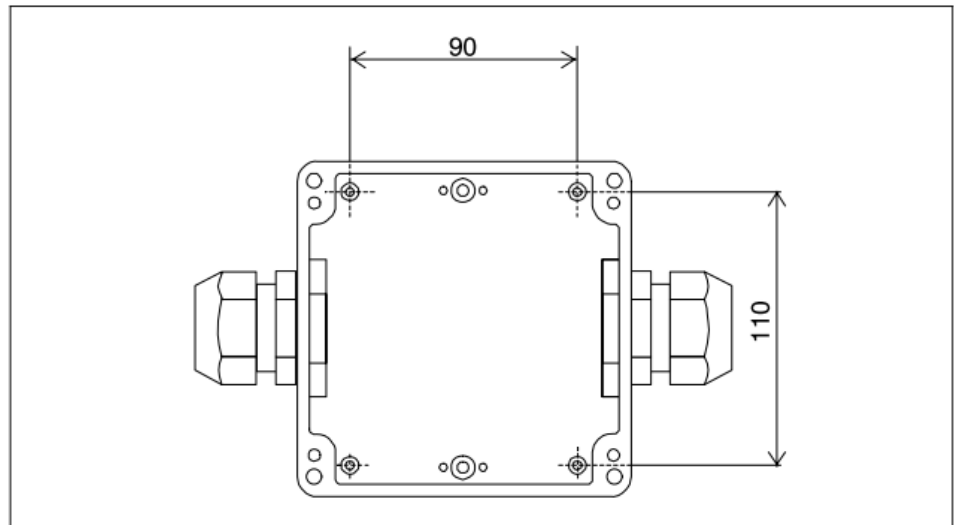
Distances of the drill holes in the bottom of the air filter housing
